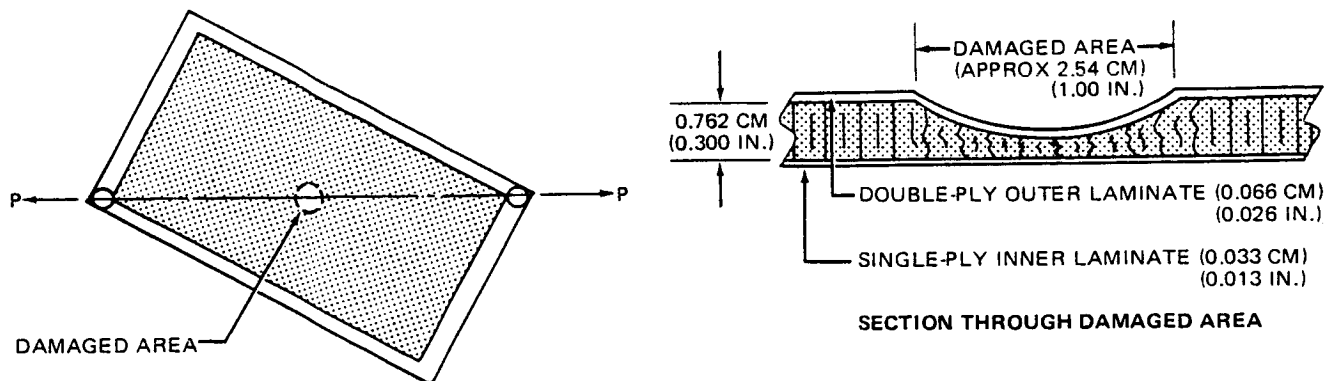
FAILURE OF Z3943443 CENTER SLIT PANEL SPECIMEN
